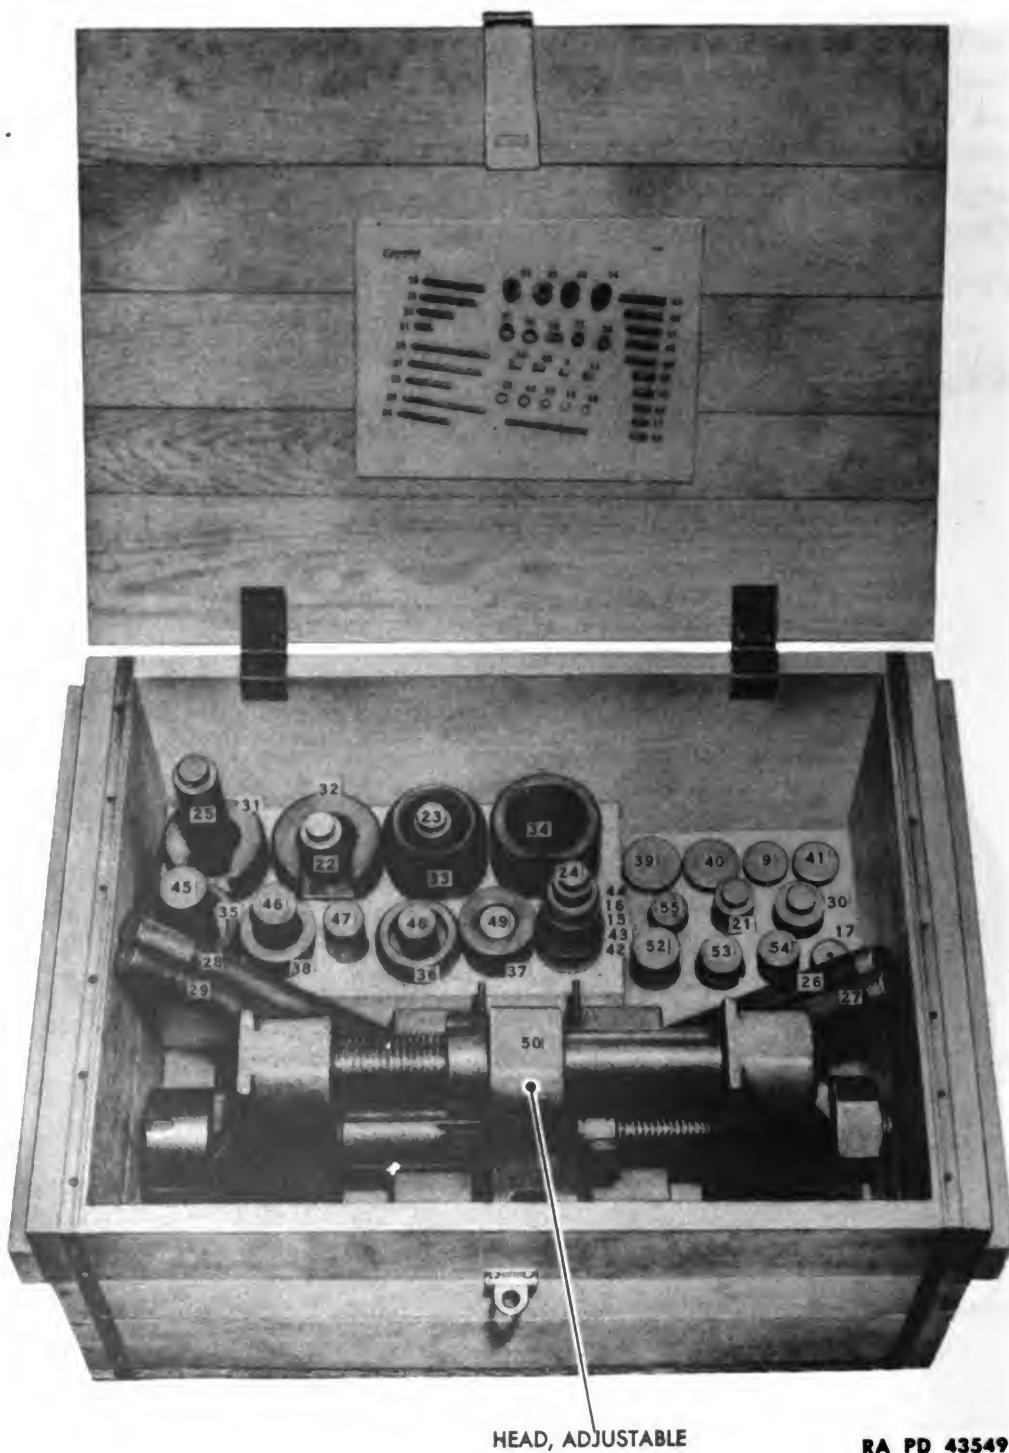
Box containing Adjustable Head and All Tools for SE-1026
